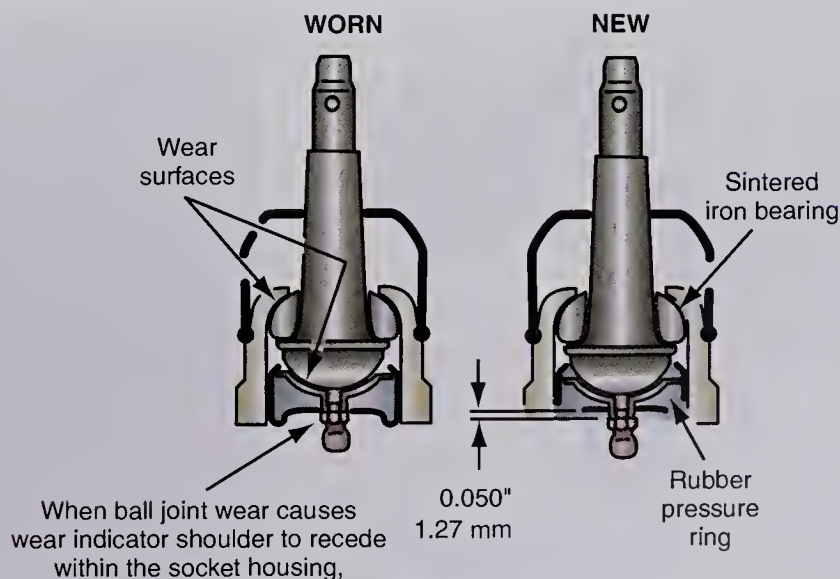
Ball joint wear indicator with grease fitting extending from ball joint surface.
